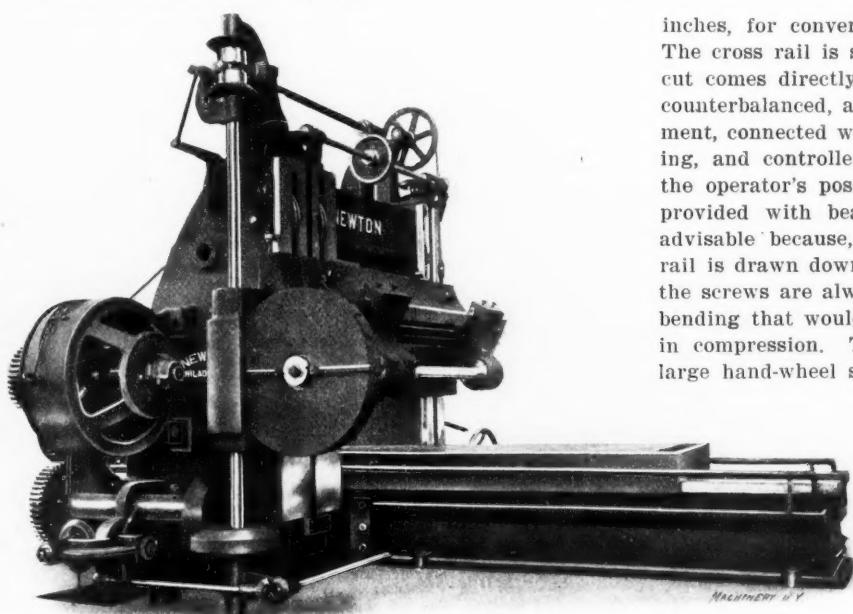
Newton Horizontal Milling Machine from Motor and Worm-drive Side.
